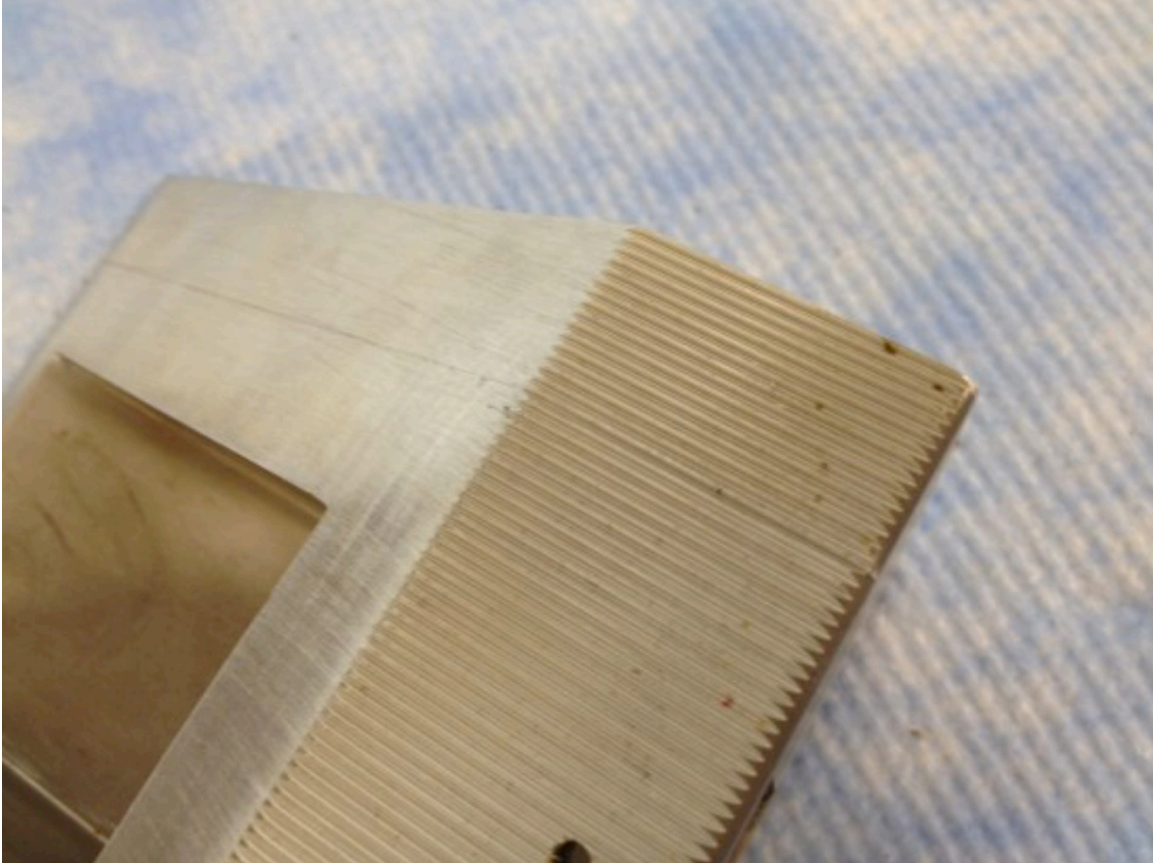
Two edges (one shown here) of each coil-body have machined grooves to guide the wires during winding. The glue joint between the main coil-body and one of its end units is just visible in the image.
